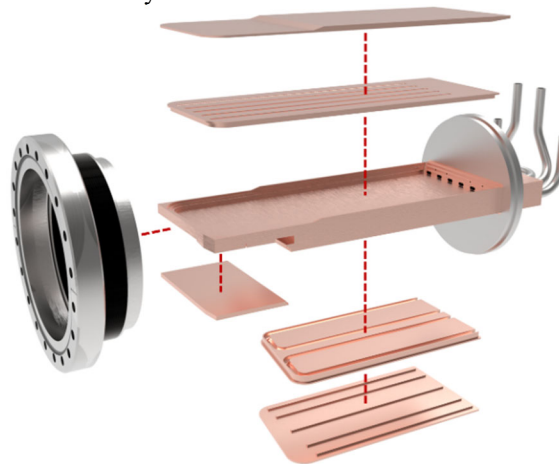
Simplified exploded view of B:CA1, with the major fabrication steps represented.
